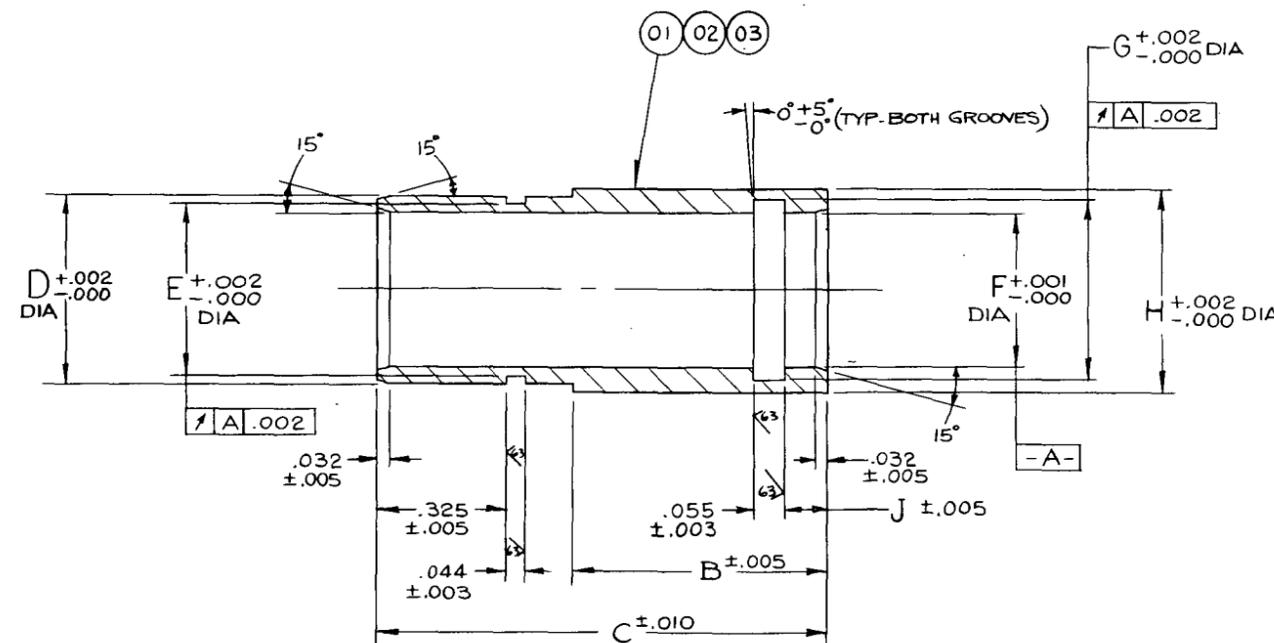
Filler Strap Detail Assembly (FLECHT-SEASET Unblocked Bundle)
